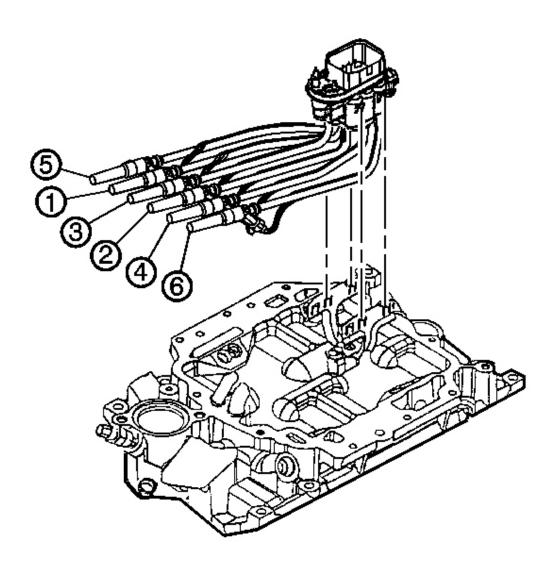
Injectors At Lower Intake Manifold Bores Courtesy of GENERAL MOTORS CORP.
